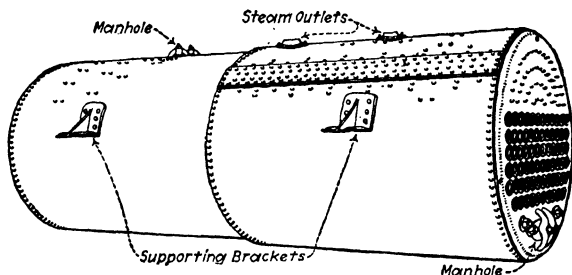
Horizontal return-tubular boiler with supporting brackets.
